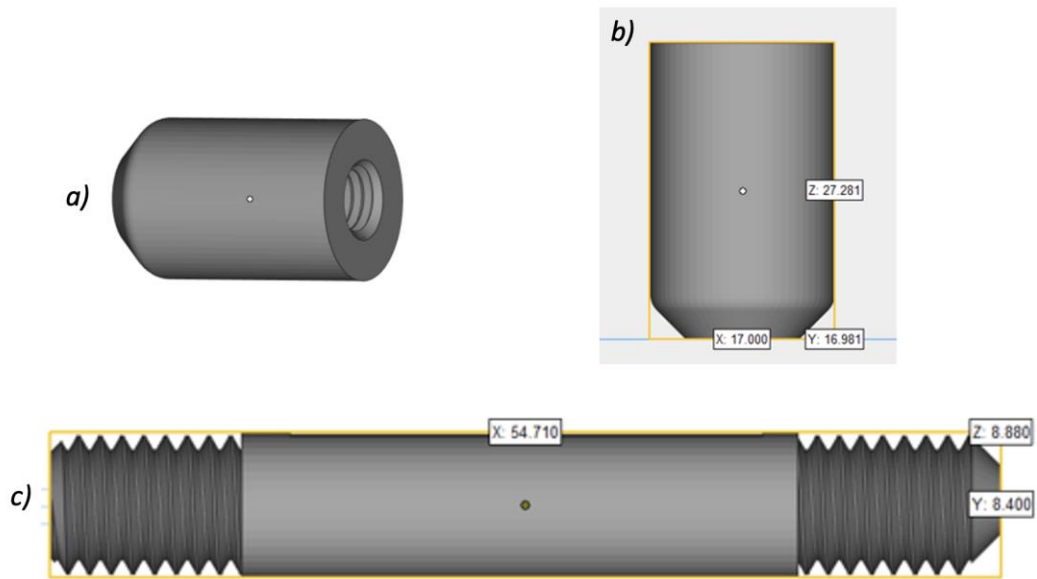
Designed tensile test specimen a) part that attached to the tensile test equipment b) dimensions of part that attached to the tensile test equipment and c) body of tensile test specimen with dimensions
